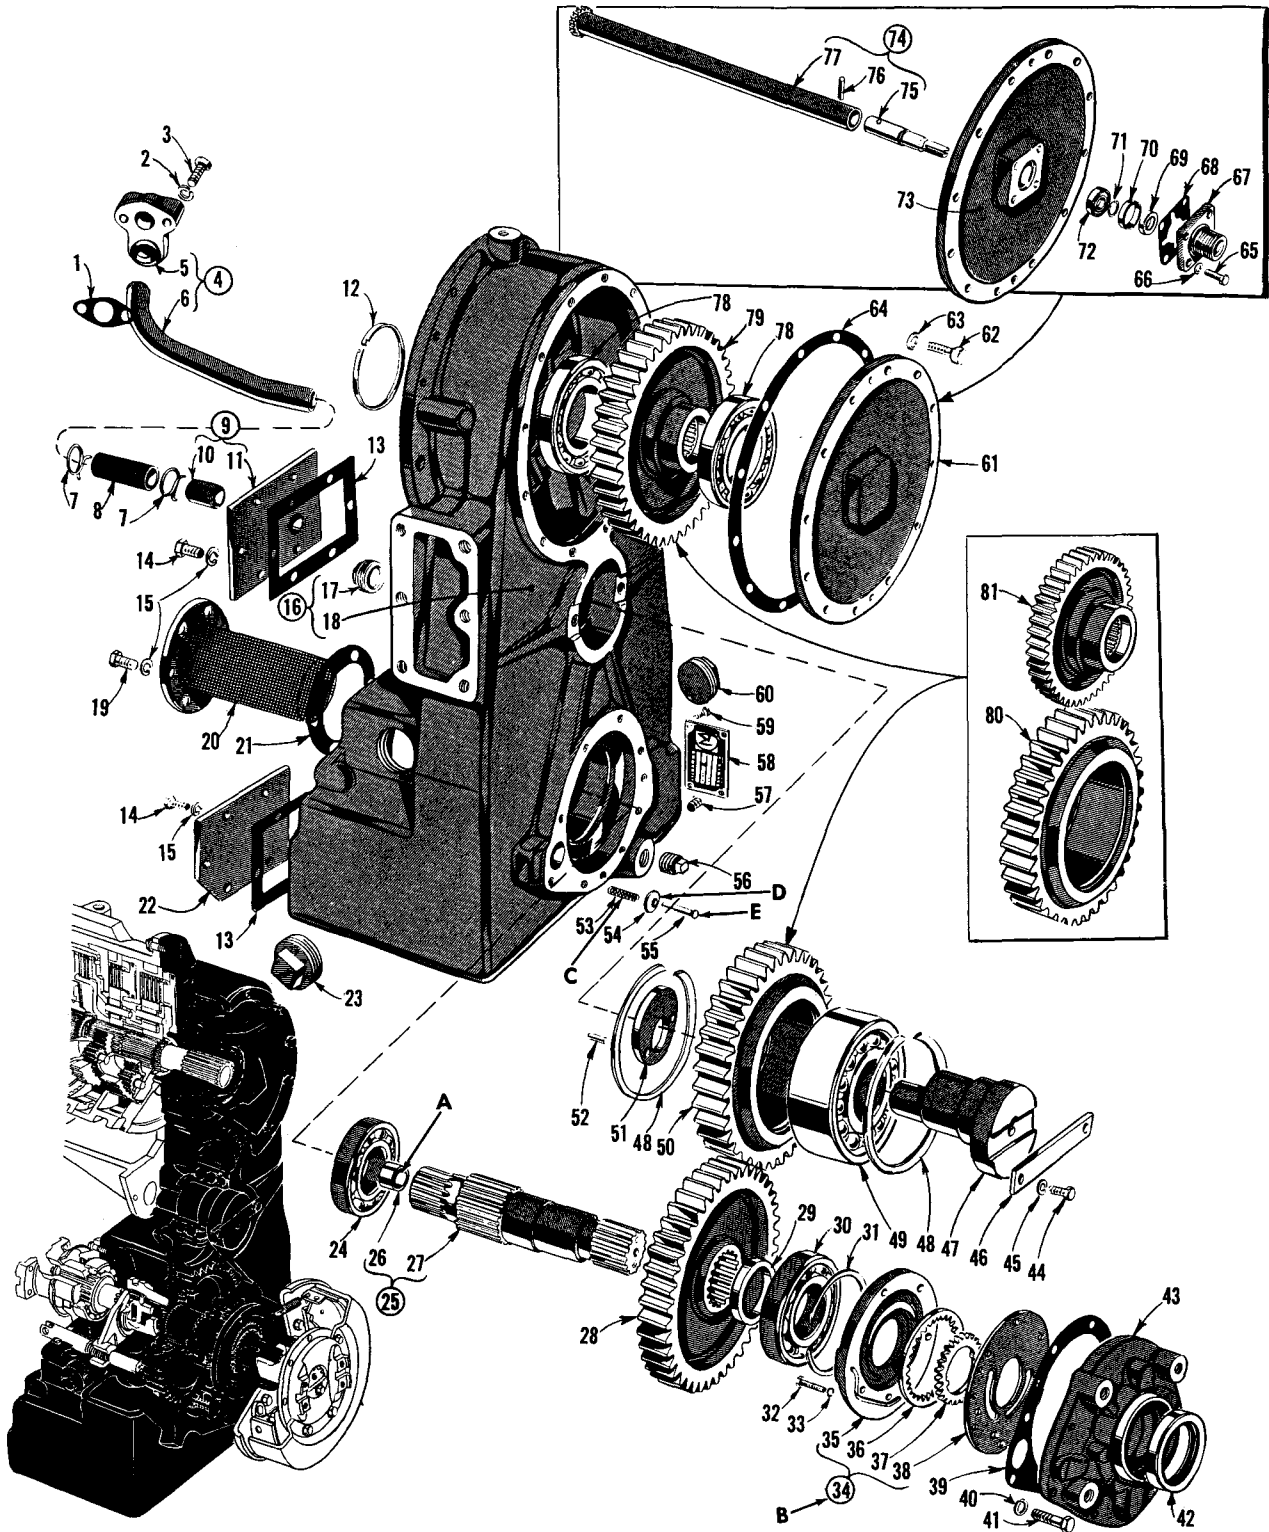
Model CRT-3330-1 transfer gear housing group, exploded view
